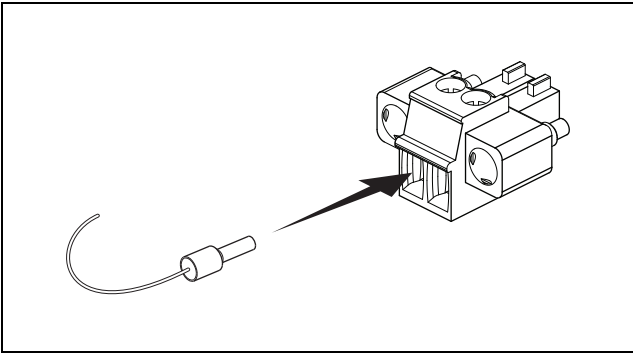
2-Terminal Detachable Screw-Terminal Connector with Ferrule
